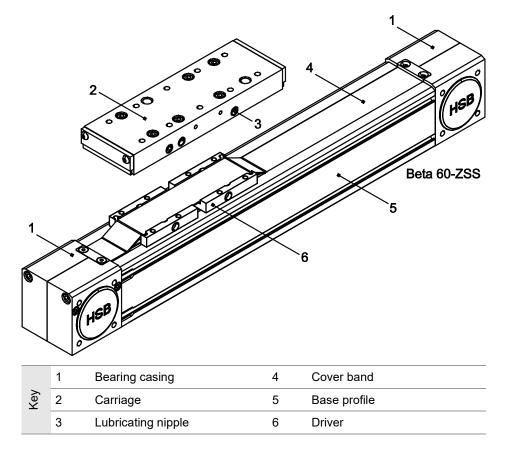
Component assemblies of the Beta 60 linear unit with timing belt drive
